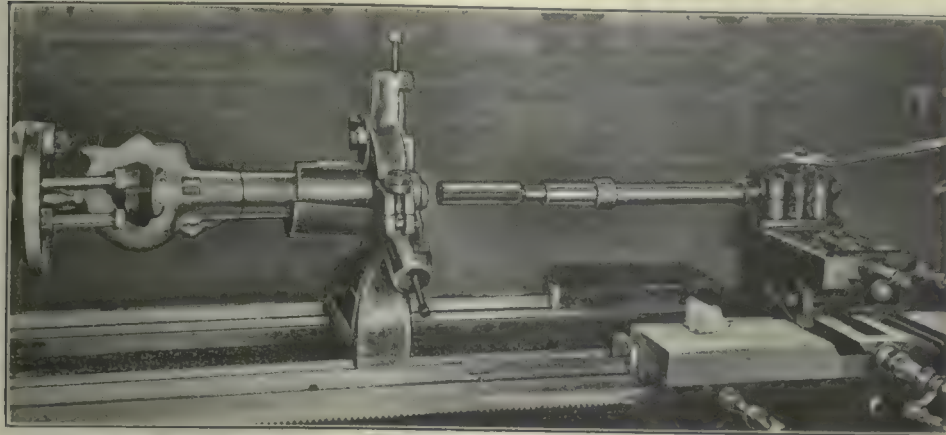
LATHE SET-UP FOR BORING AND REAMING HAMMER BARREL
